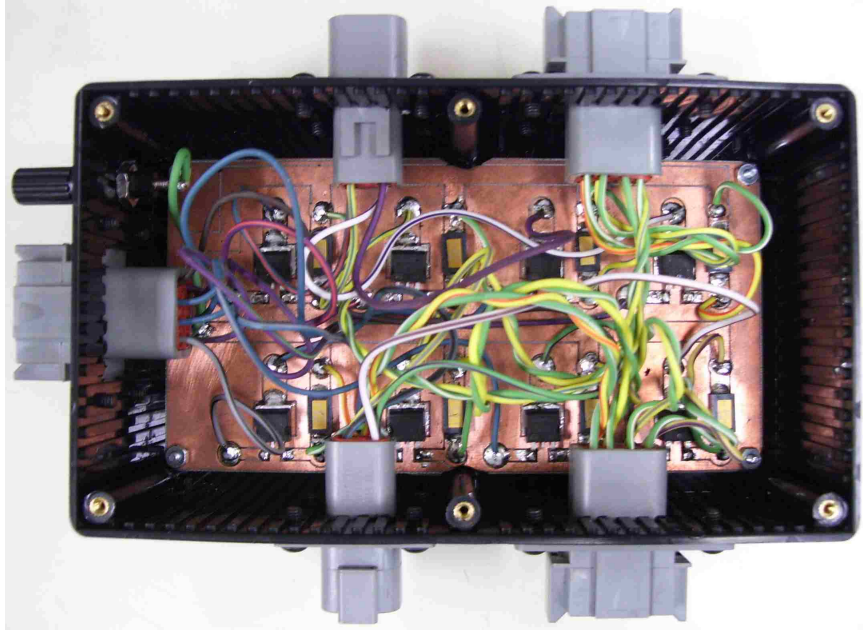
Final Assembled Coil on Driver (Box Bottom View)
